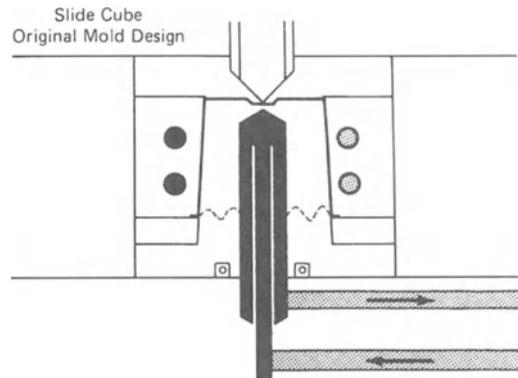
Original design for slide cube mold with inefficient bubbler (four-cavity mold using GPPS).
